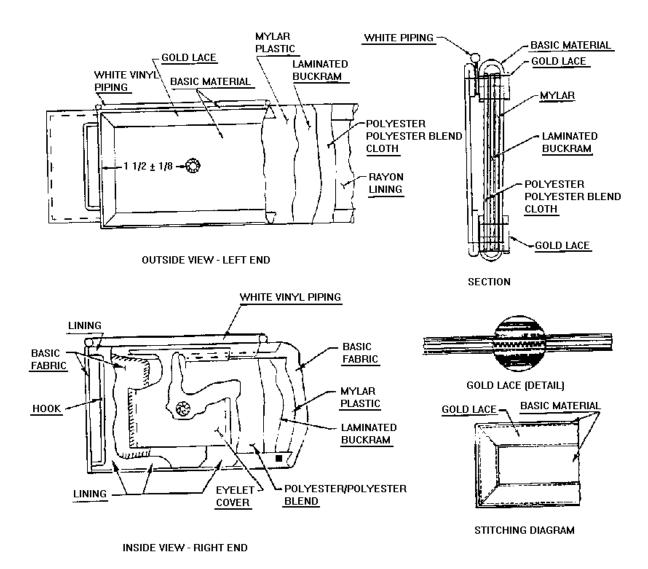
Coat, Man's - Summer and Winter, Scarlet, Drum and Bugle Corps, Drum Major and Director
